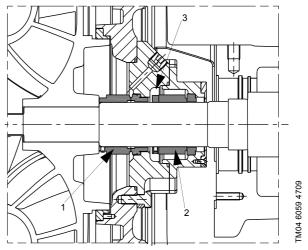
Tandem seal arrangement consisting of two shaft seals
